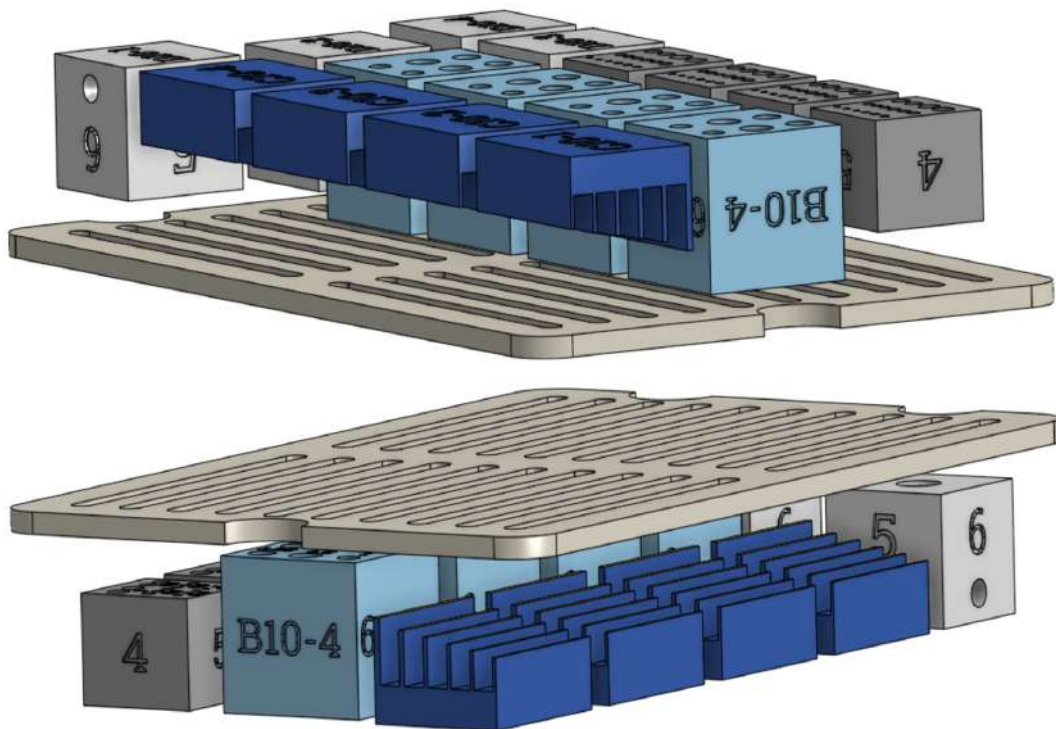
Fin array with base plate enlarged so that tweezers can lift the components without causing damage
